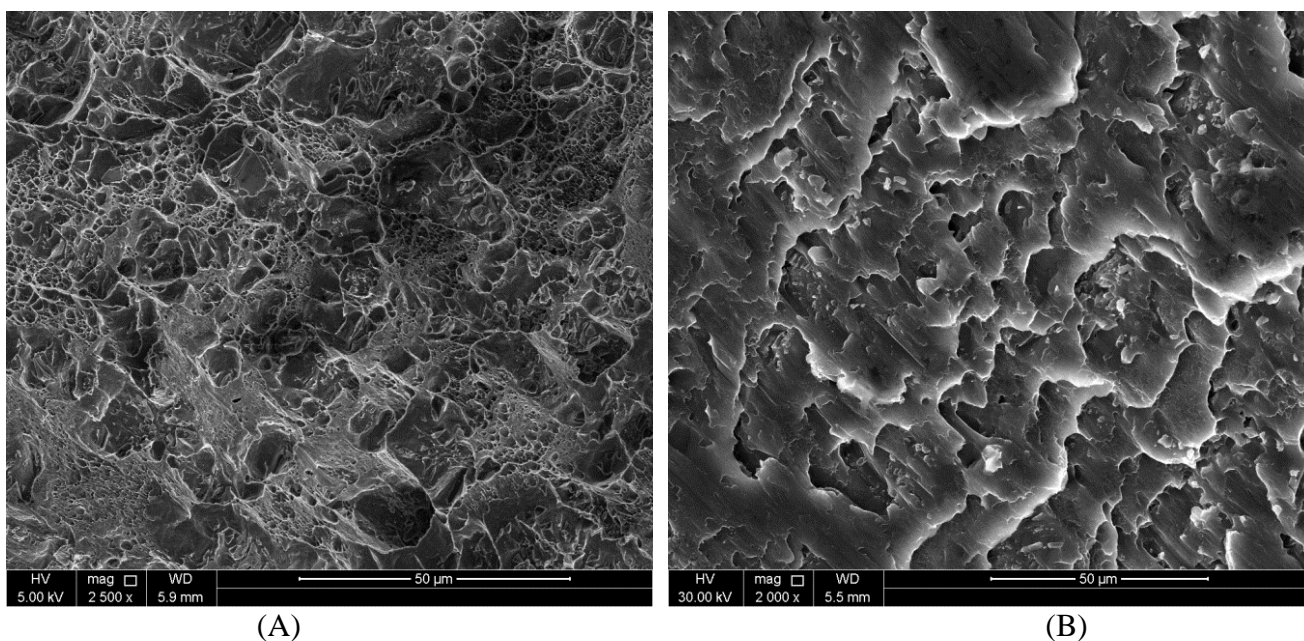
Fracture morphology of (A) MIG welded and (B) un-welded specimens after tensile test
